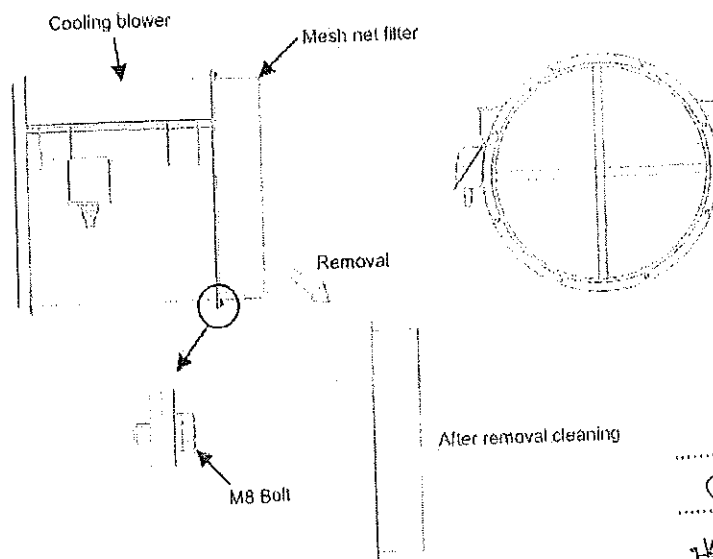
Cleaning Cooling Blower Metal Mesh Filter.
